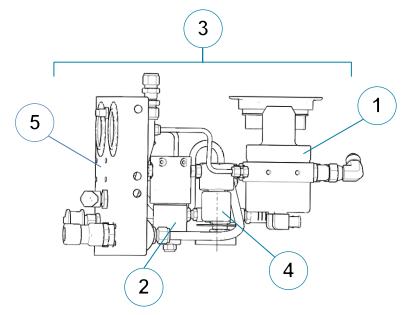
Typical solenoid valve (4) location inside FMM (3) between HP filter (2) and pressure regulator (1). FMM face panel (5) shown for reference.
